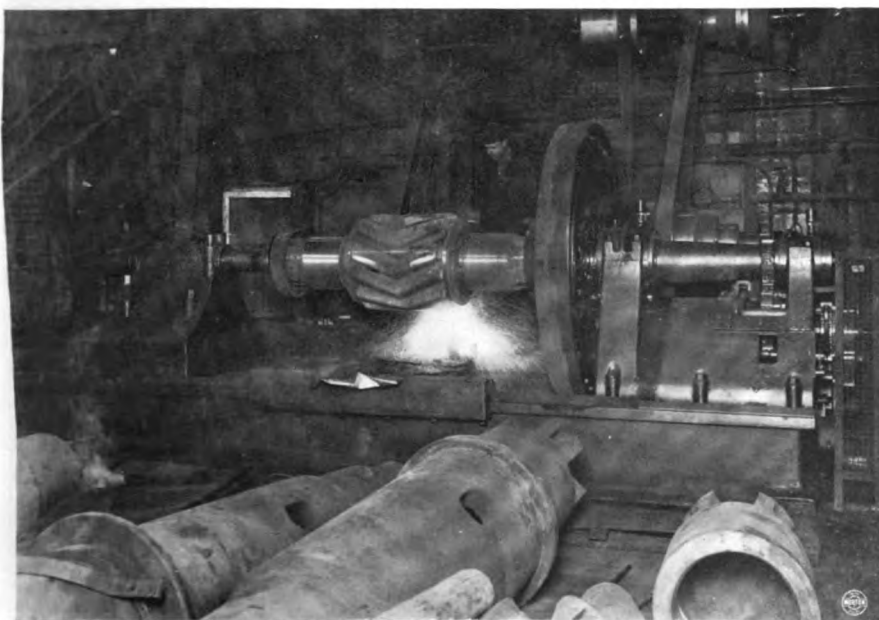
A 72-inch lathe equipped with special fixture for cylindrical grinding
